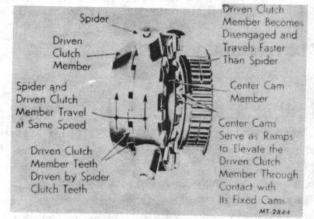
Forward Left-Hand Turn (Cross Sectional View)
